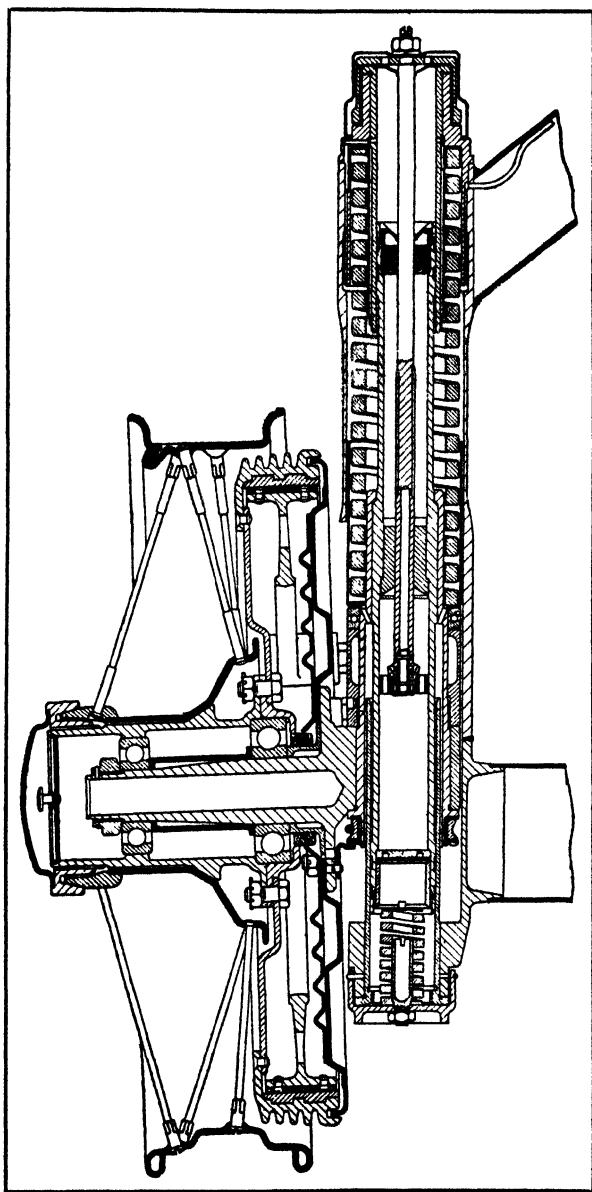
LANCIA FRONT INDEPENDENT SUSPENSION.
